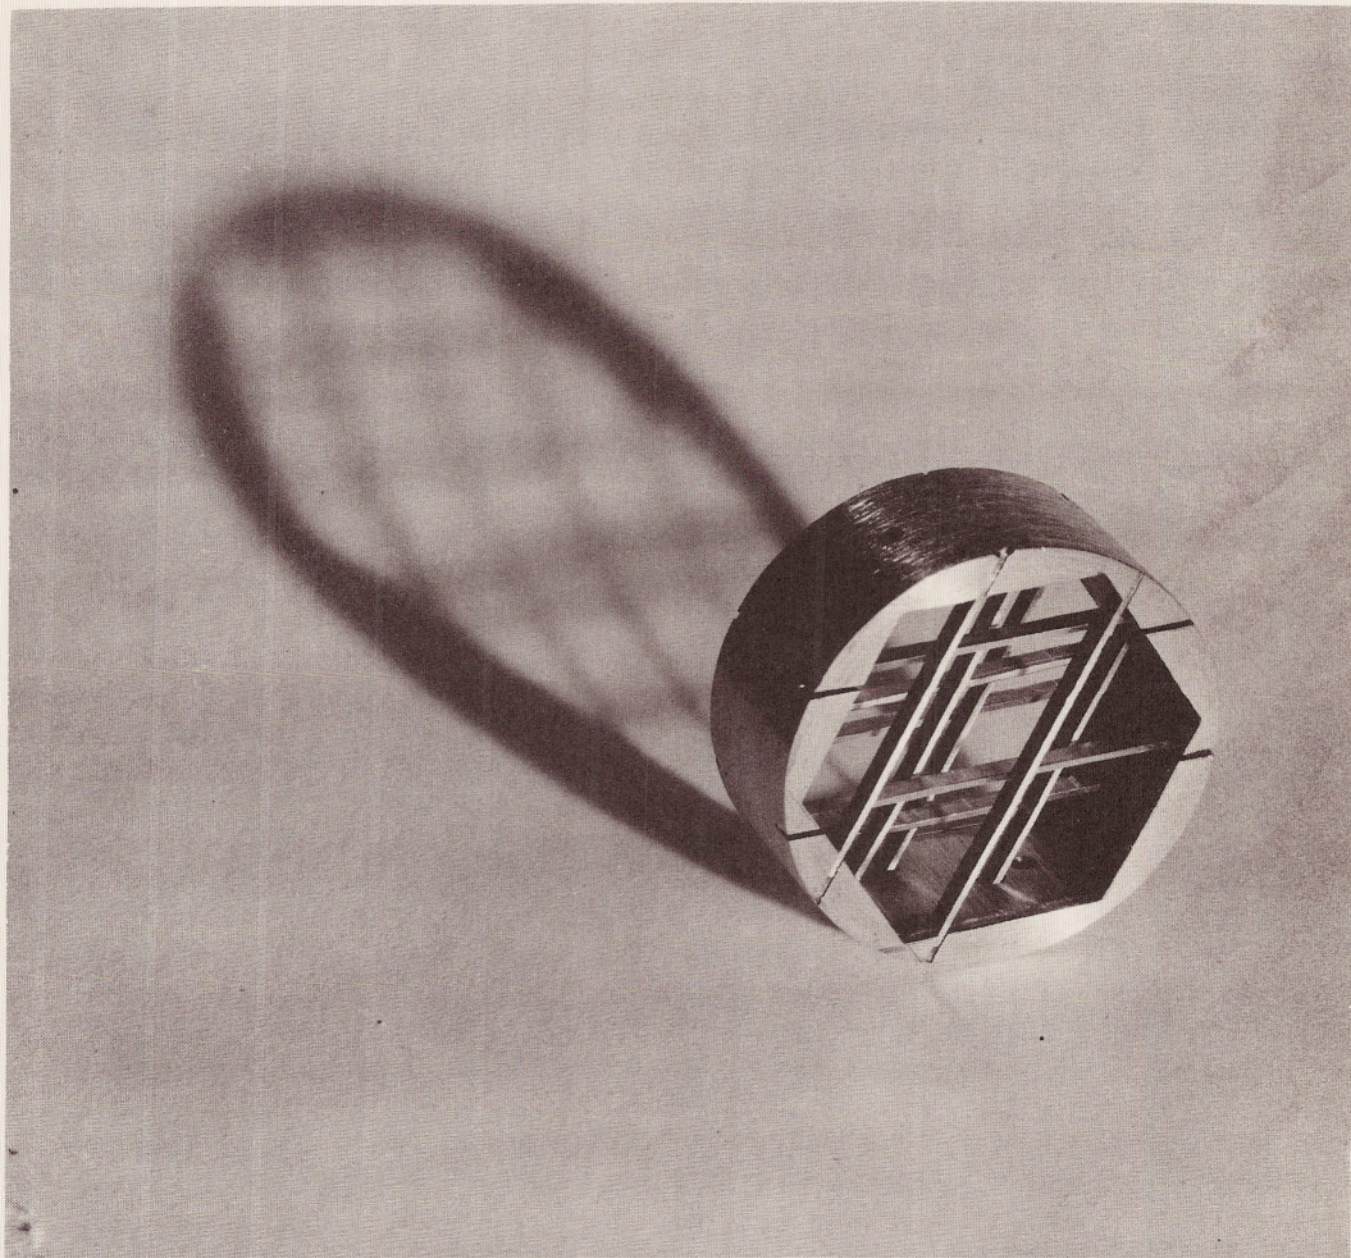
Operating rod tube sheet. (A-C Photo 211256)
